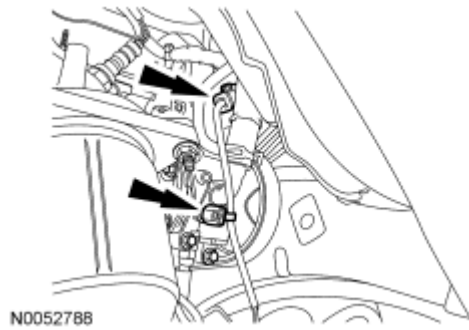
Locating RH Halfshaft Bearing Support Bracket Bolts
